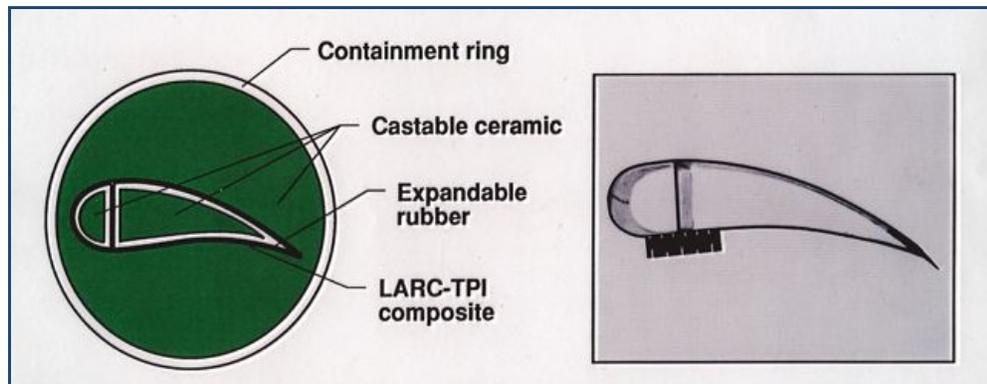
Airfoil Fabricated by Rubber Expansion Molding
